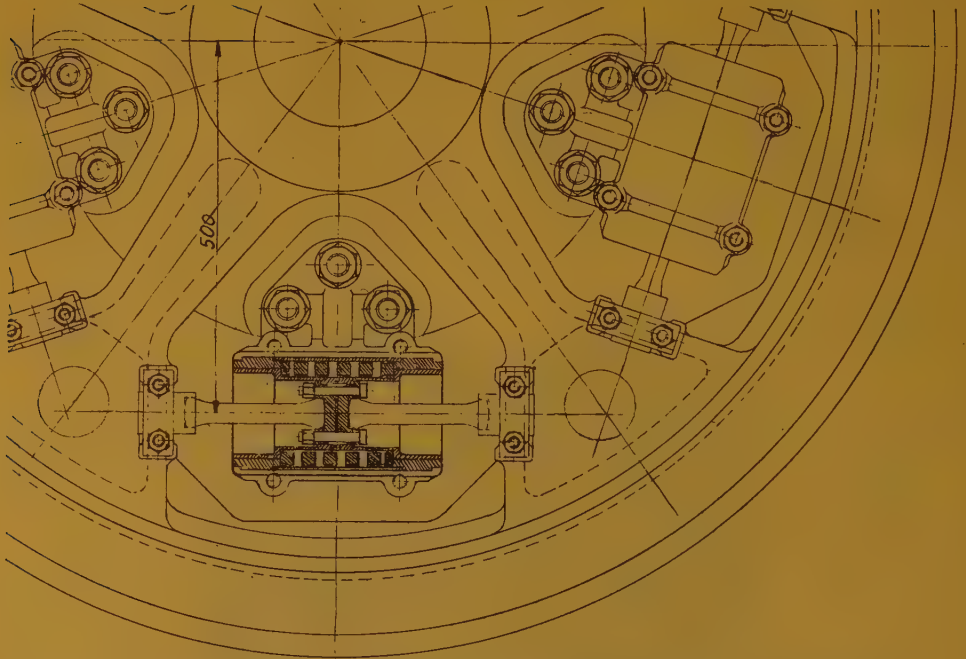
Vertical section of spring couples with push rods, original patented system.
